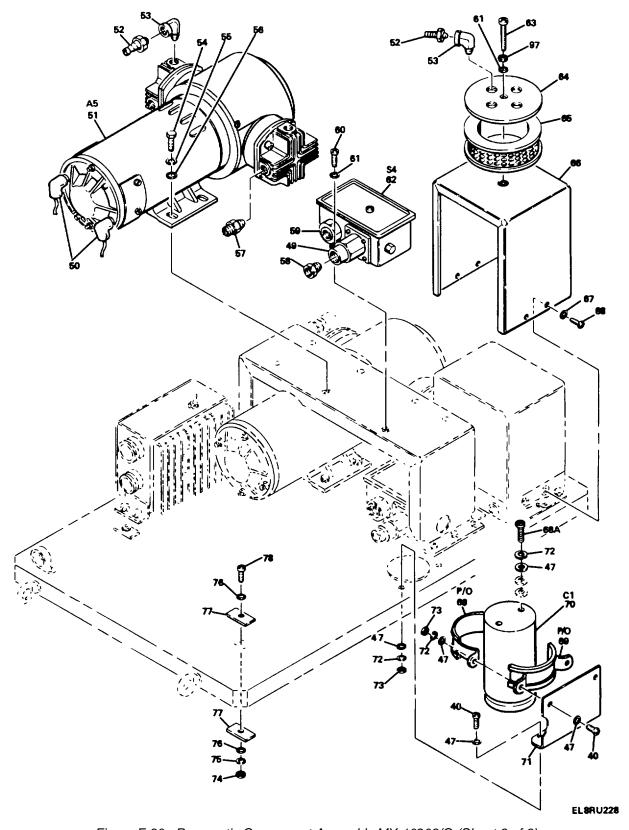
Pneumatic Component Assembly MX-10203/G (Sheet 3 of 3)
